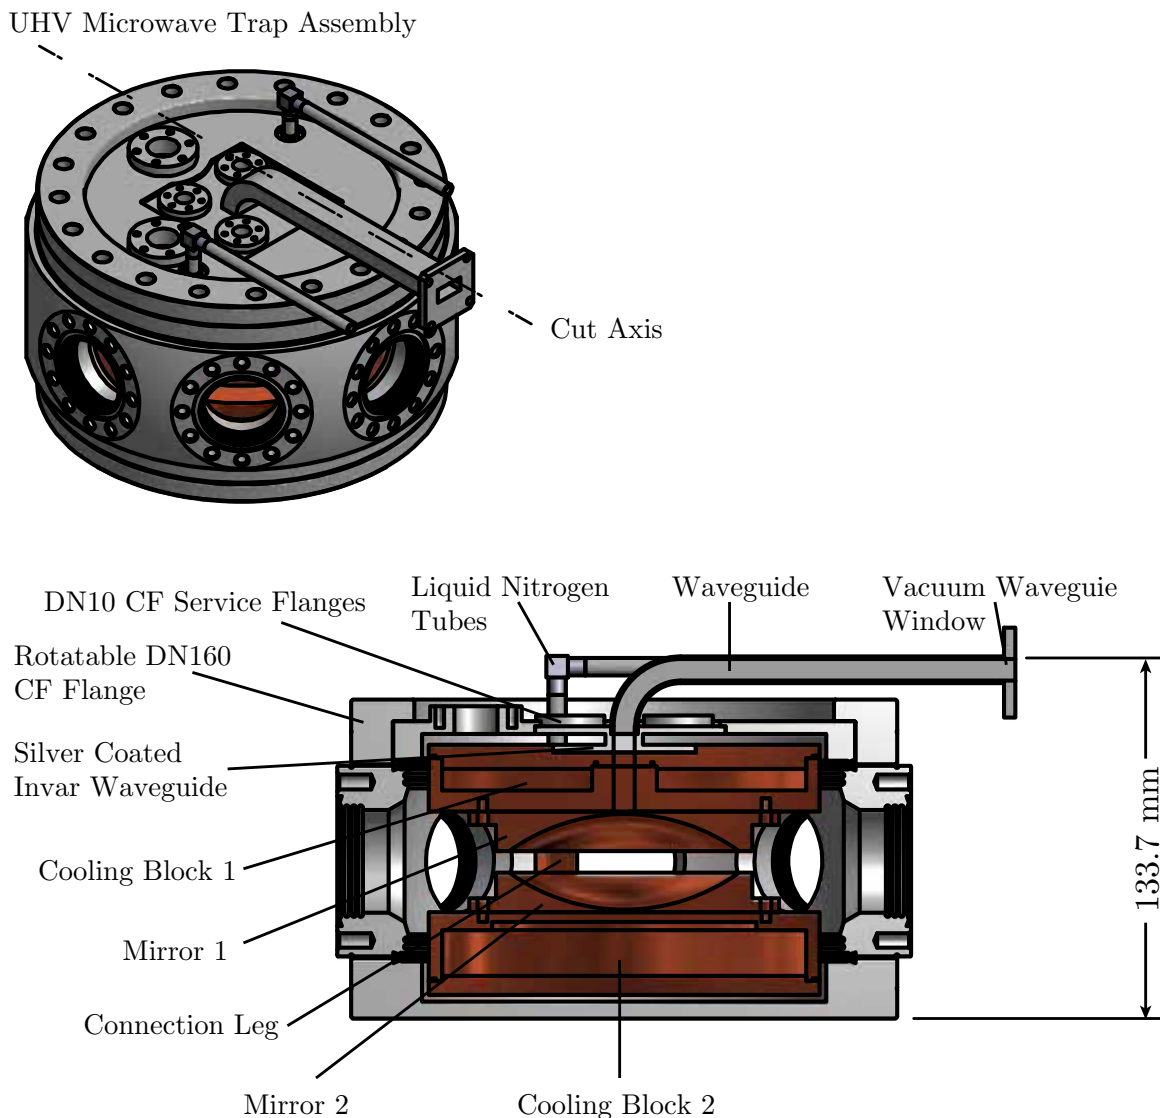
Top: A 1:4 scale drawing of the ultra-high vacuum assembly. Bottom: A 1:3 drawing of a central cut through the chamber. The cavity and cooling blocks are attached to the top flange of the vacuum chamber via two thin-walled stainless steel tubes. This provides the thermal break necessary to keep external heat transfer from the outside to a minimum. The mirrors are located with precision dowel pins to provide good axial alignment and can be removed from the setup without the need to disassemble everything. The angular alignment of the mirrors with respect to each other is predefined by the alignment of the cooling blocks and must be better than 10^{-3} radians. The waveguide that feeds the cavity with high power microwaves from the klystron consists of two parts: First, a room-temperature part which combines a standard WG-18 waveguide bend with an ultra-high vacuum compatible, high power waveguide window which is glued into the flange of the standard waveguide. This standard waveguide is connected (welded) to a custom-built silver-plated invar waveguide which is bolted to the cooling block through the DN10CF service flanges. This assures good electrical contact of the waveguide to the cavity. A waveguide bore in the cooling block then guides the microwaves to the cavity mirror.
